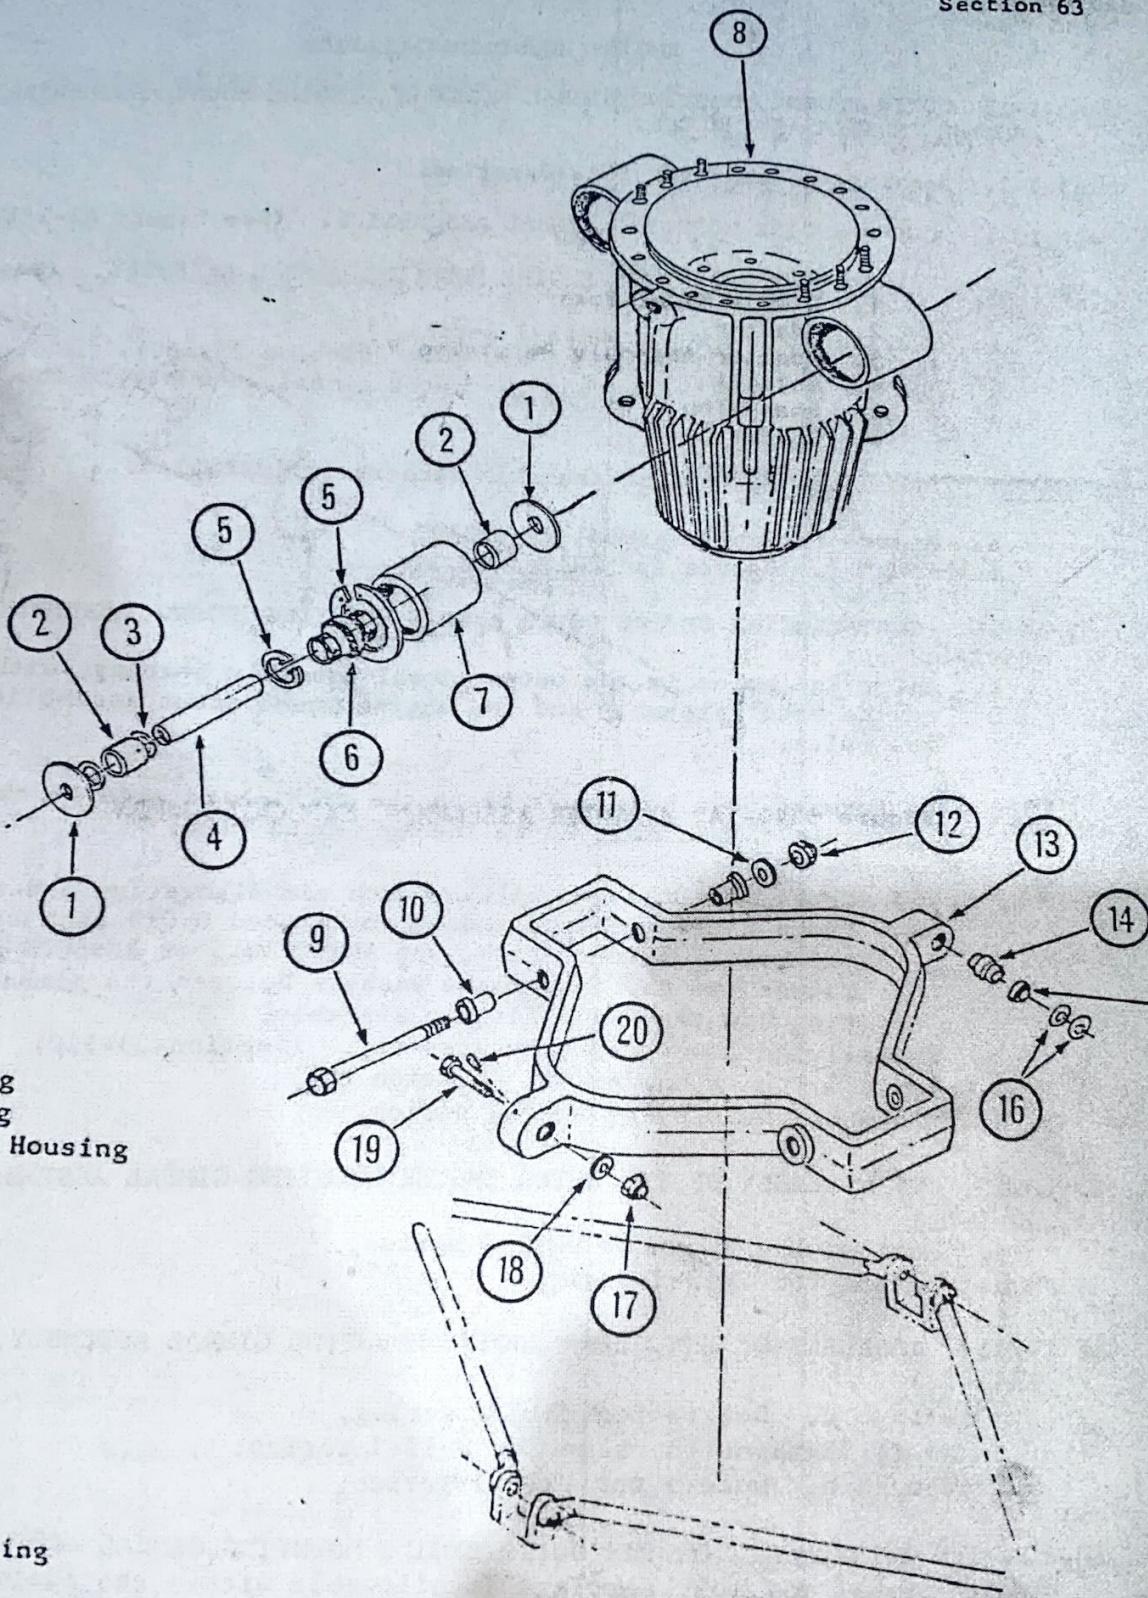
(Revised). Engine Mounting Gimbal Assemblies
